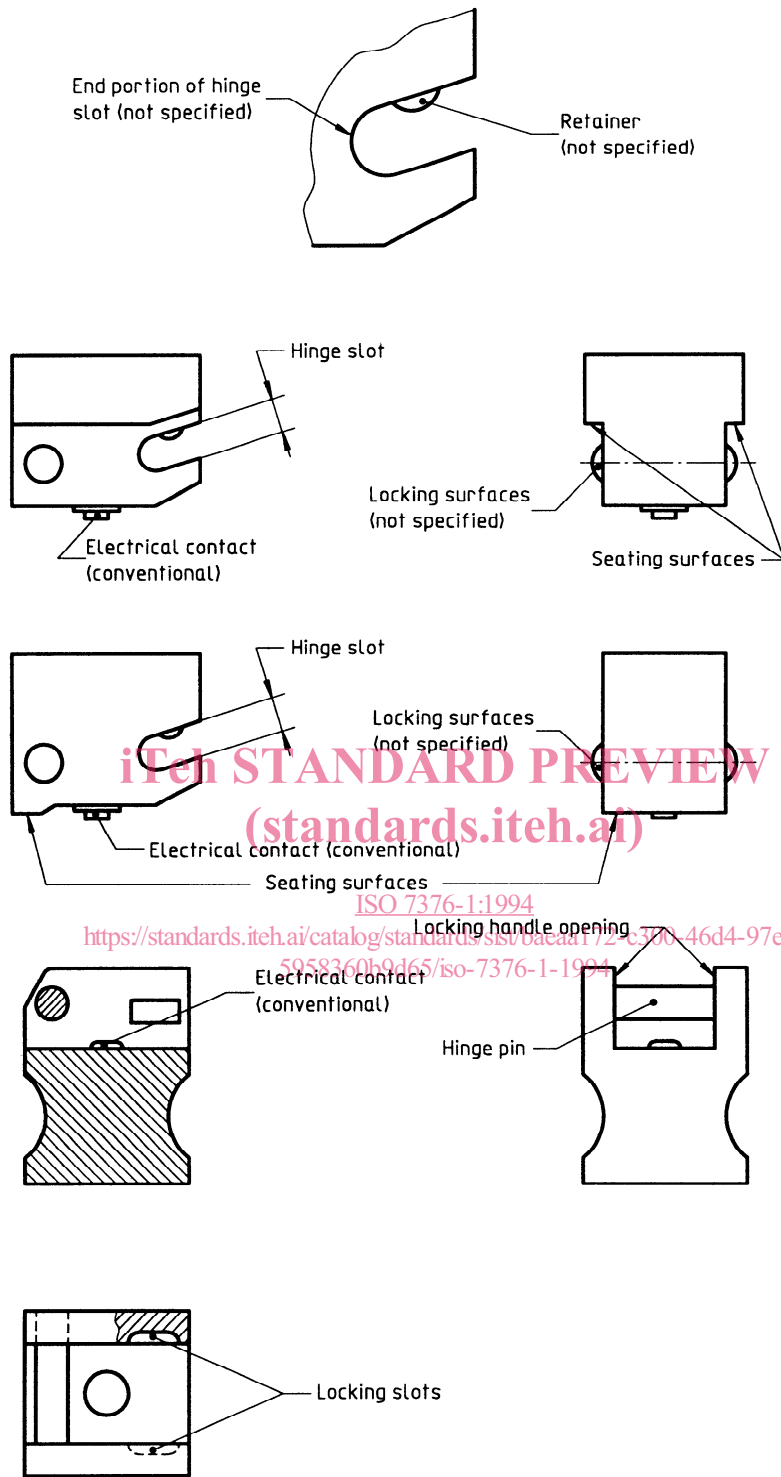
Typical blade and handle hook-on fitting configurations of conventional system
